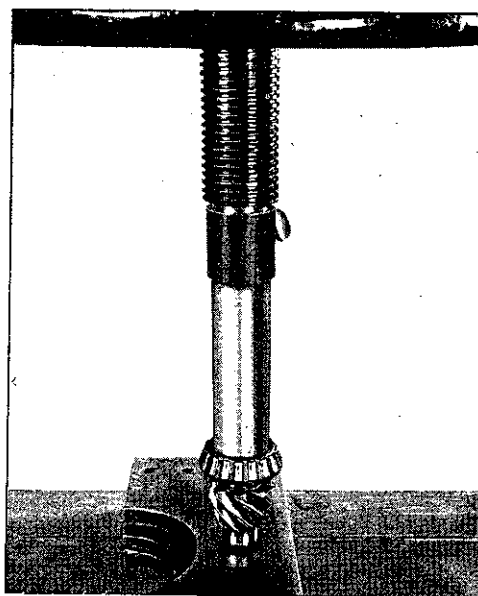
PINION REAR BEARING INSTALLING SLEEVE
